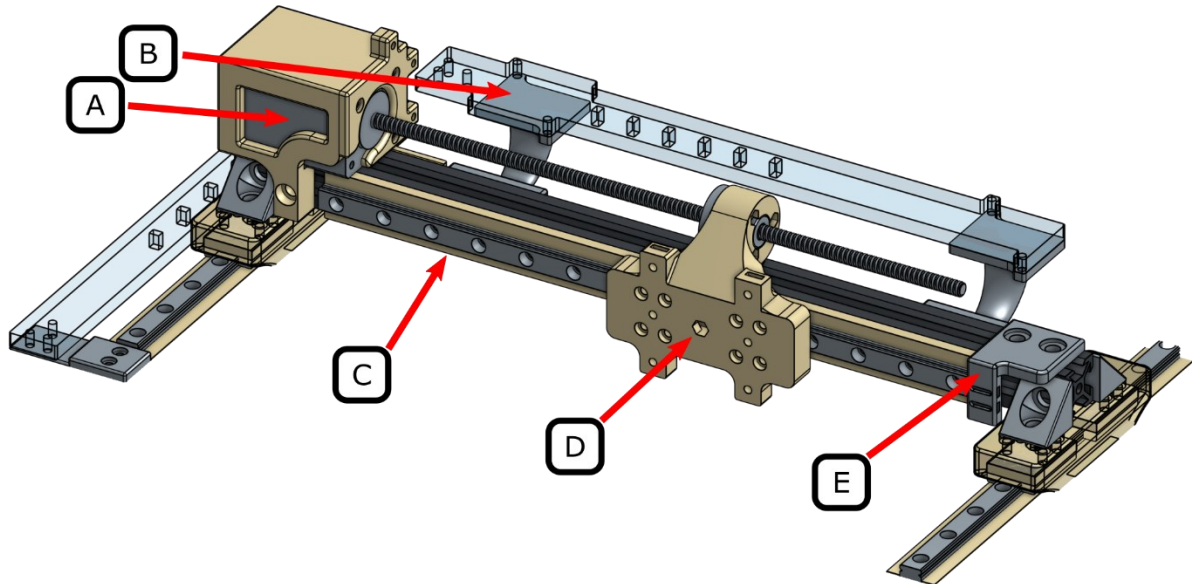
Cross section of Y-axis drive hardware. (A) Two NSK PAU09TRS linear guide carriage internally bound to (B) 3D printed joining part from linear carriages/rail to (C) lead screw nema17 motor. (D) 3D printed endstop mount (E) NSK P1U090600SKN-PCT 9 mm linear rail.
